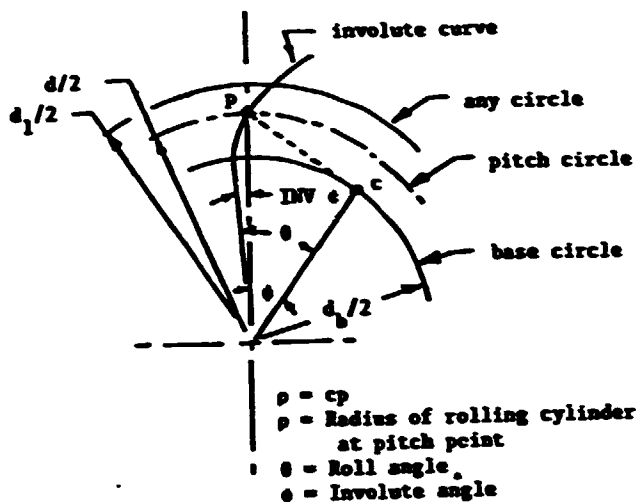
Diameter of Rolling Cylinders Representing Involute Tooth Contact
